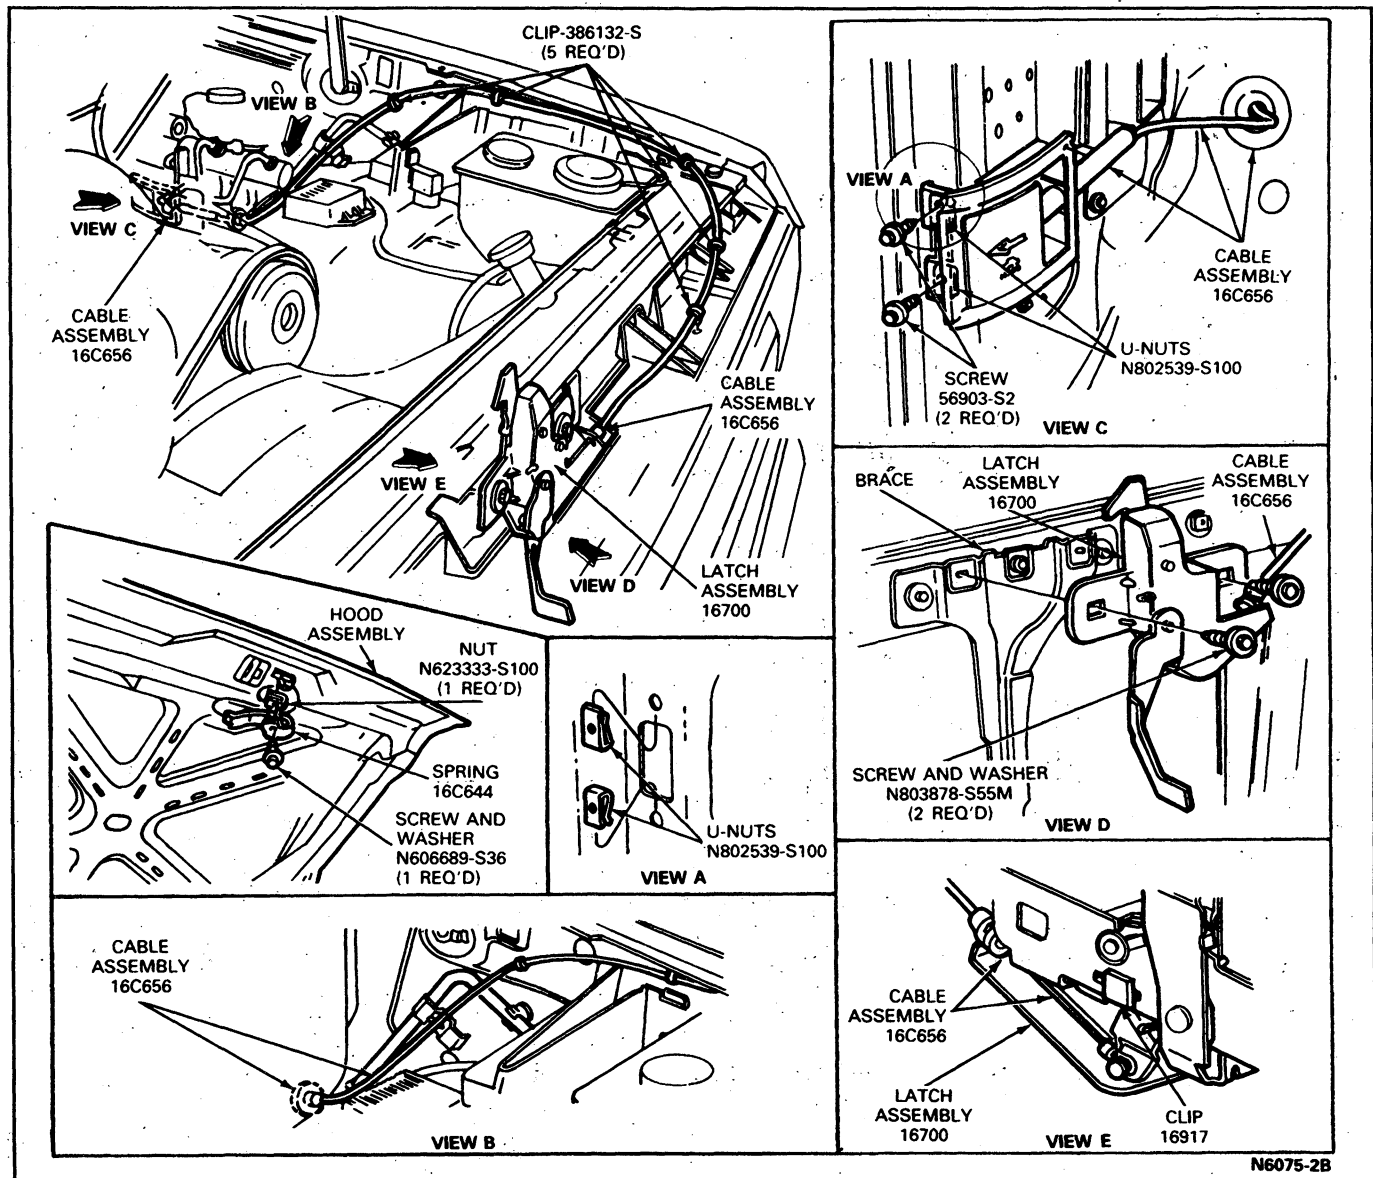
Hood Latch Remote Control Cable and Lock—F-150—F-350 and Bronco
